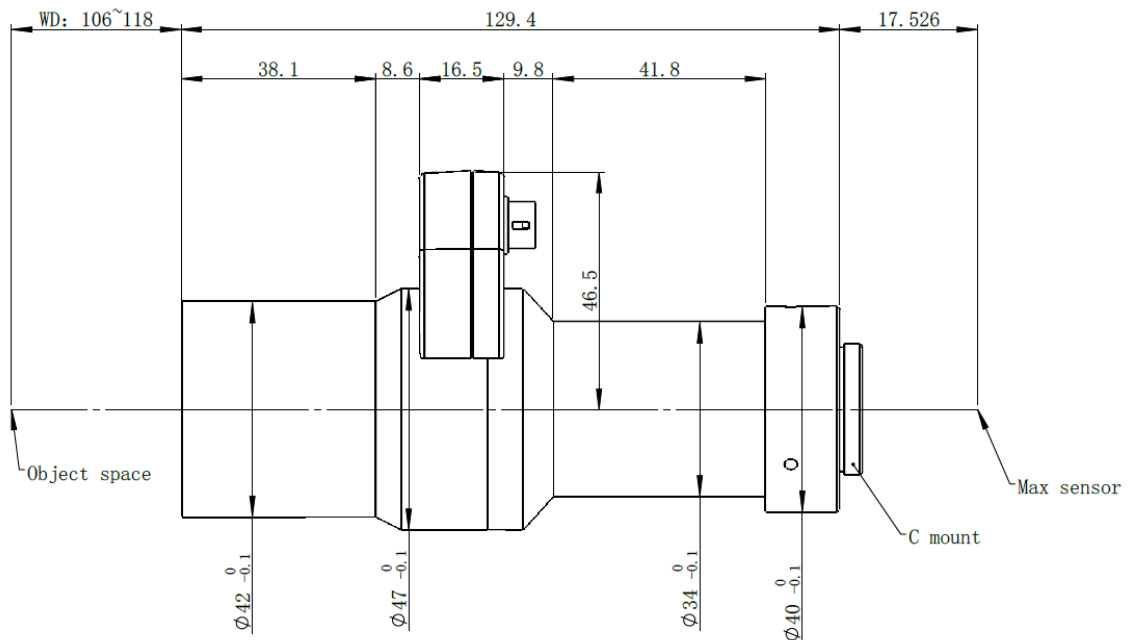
Mechanical drawing of the ruggedized TLP-S-23-1.0-110-16
